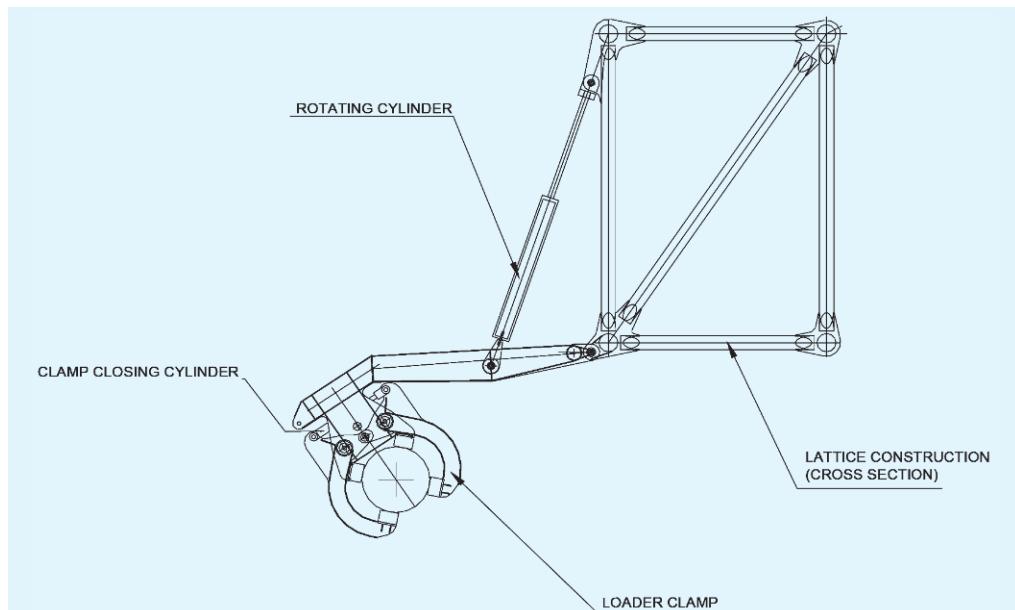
A Section view of loader system with one hydraulic driven loader arm (Courtesy of Huisman)
